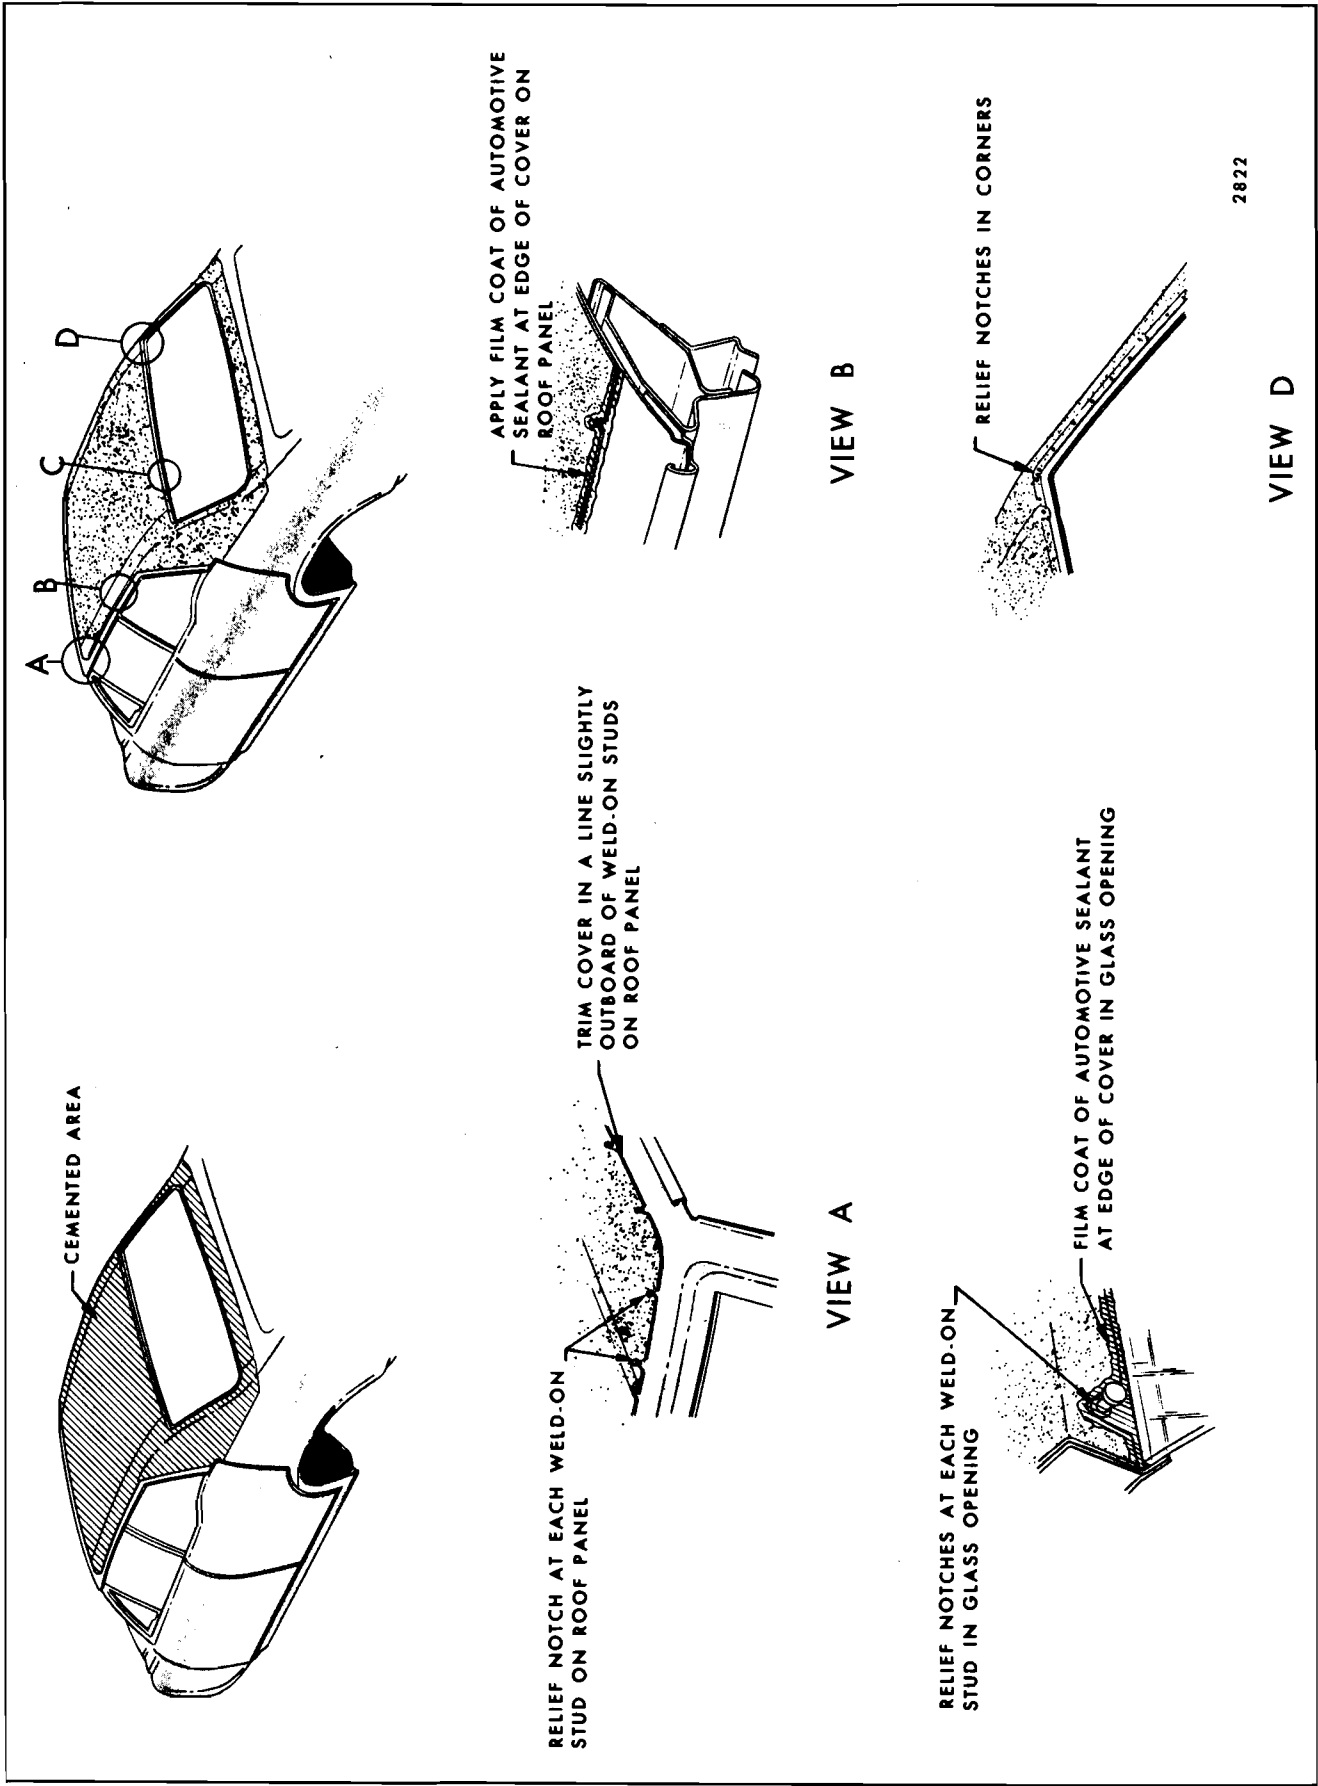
Typical Fabric Roof Cover Installation with Roof Panel Moldings and without Pad
